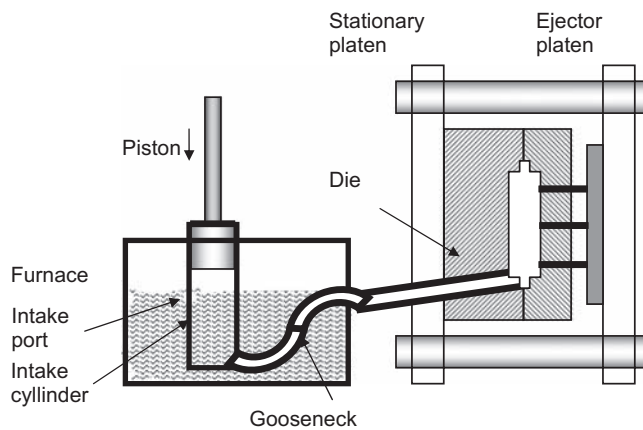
The graphical illustration of a hot chamber die-casting machine
